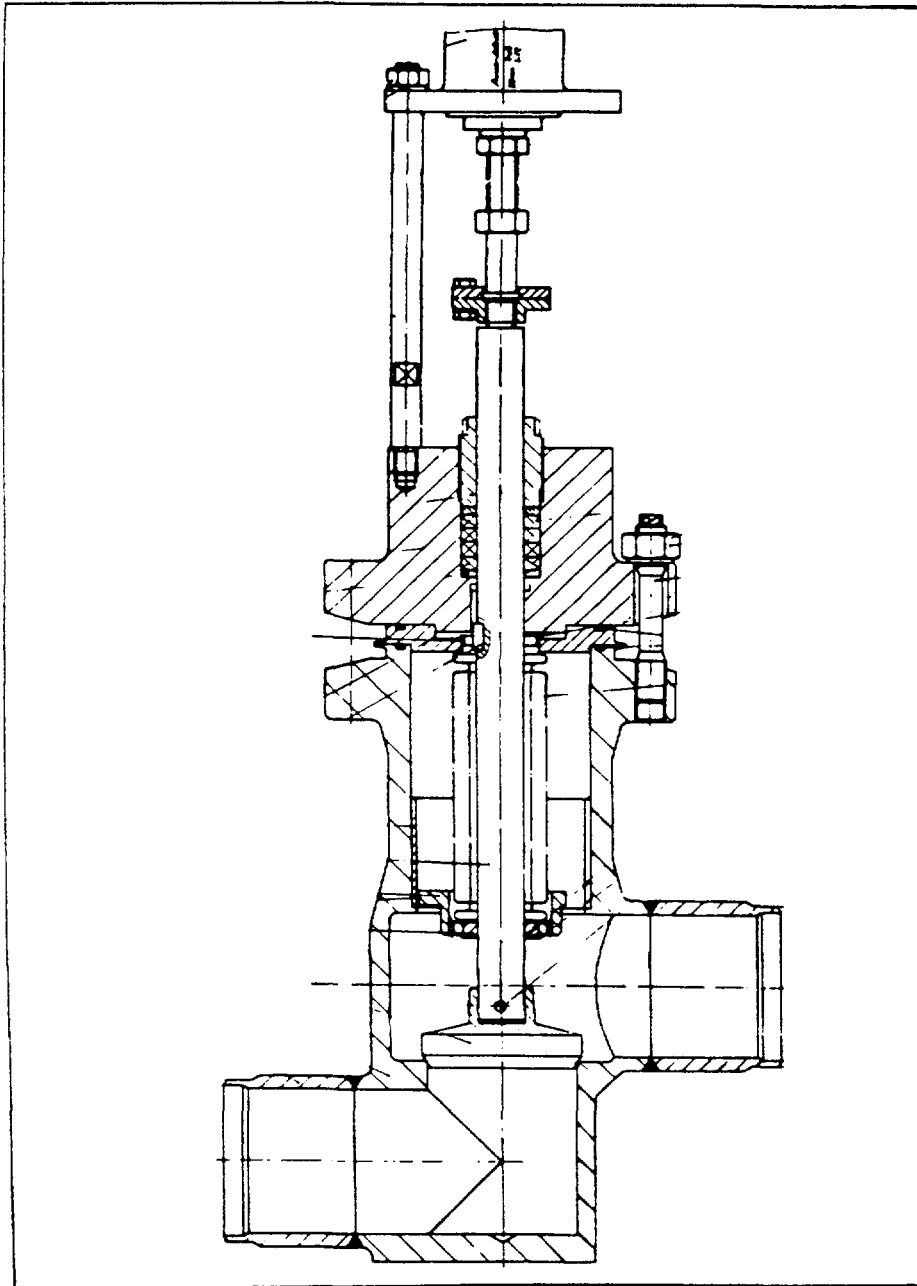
ALMERIA :: Cross Section of the Damaged Valve LK01 AA06
